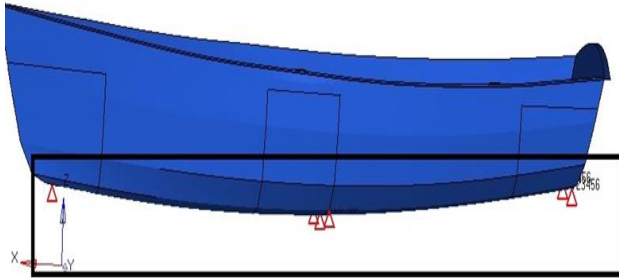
Detail drawing of 1 inch thick Aluminum honeycomb boat.
